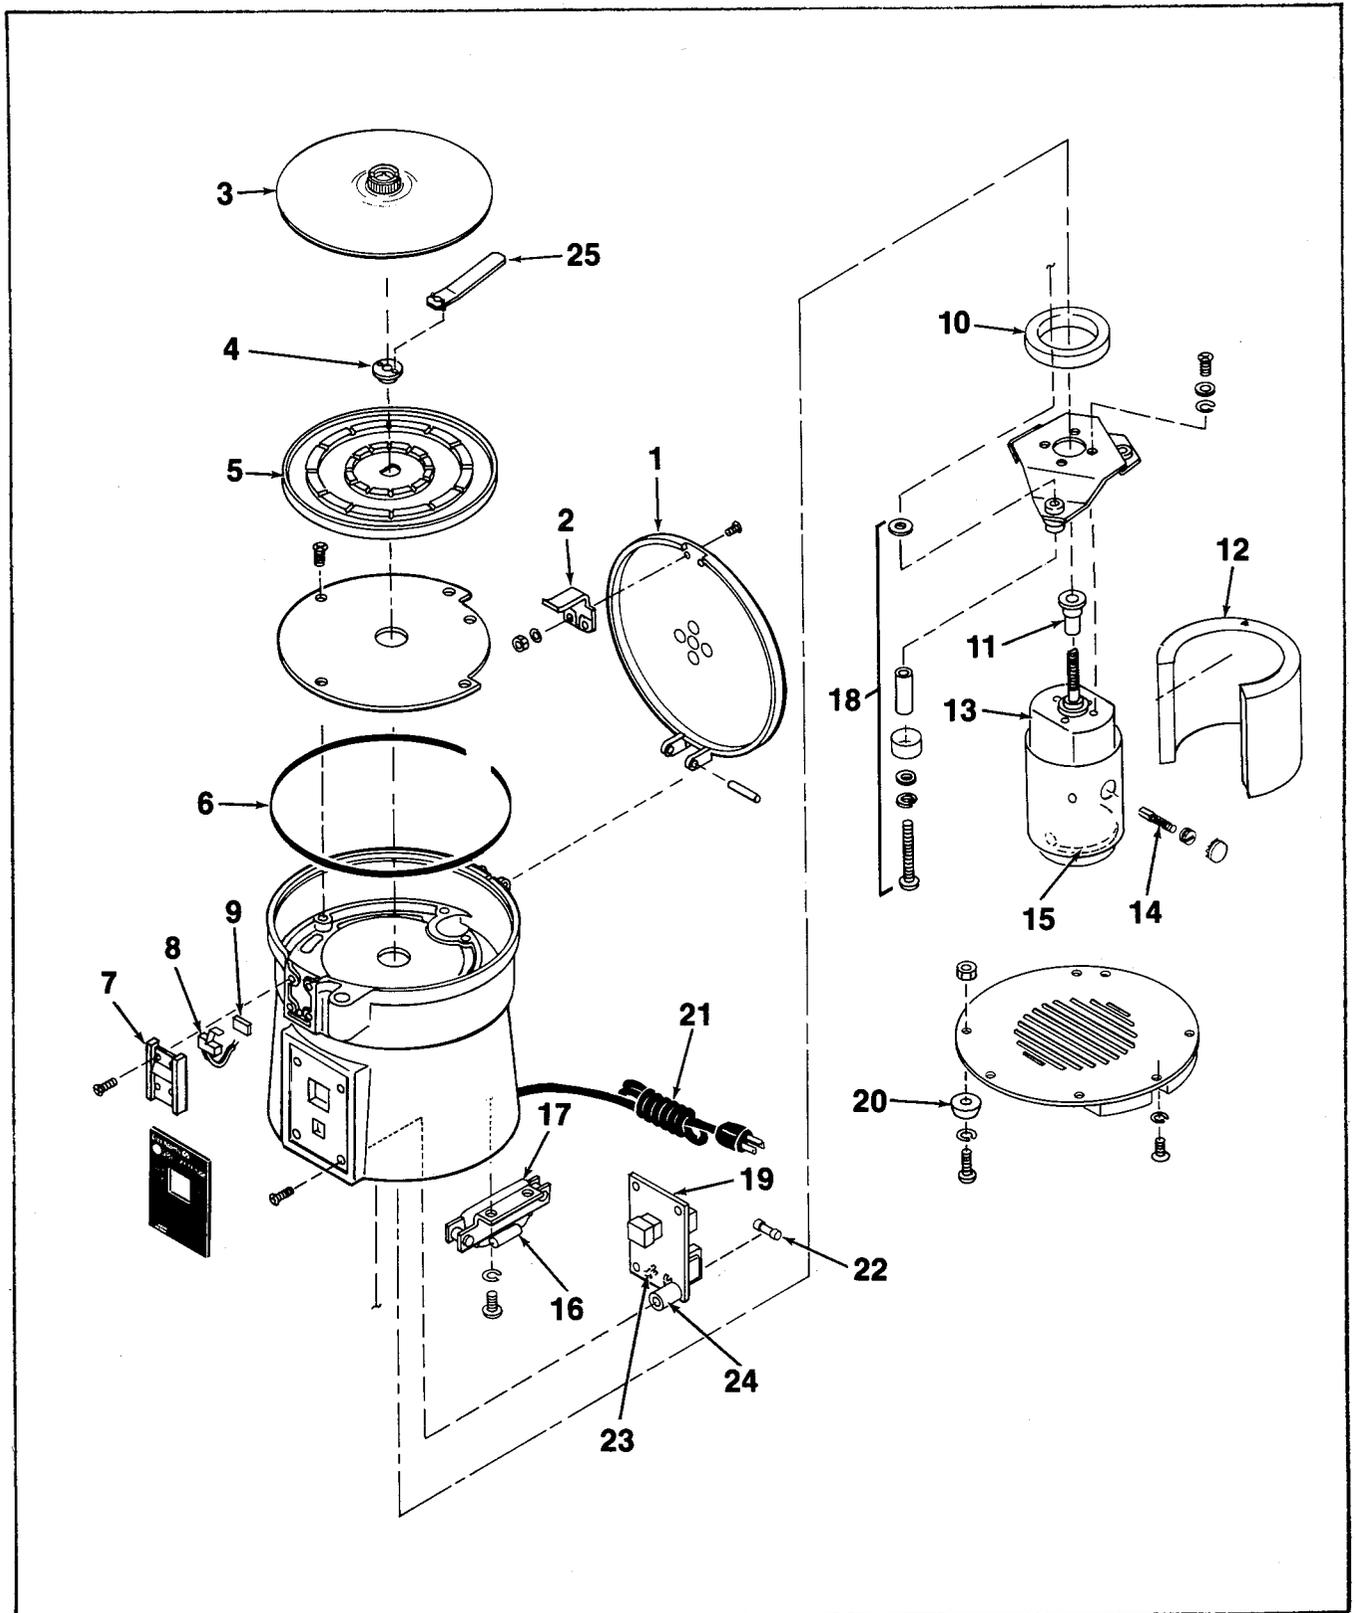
Centrifuge Model 4207, Exploded View Drawing
